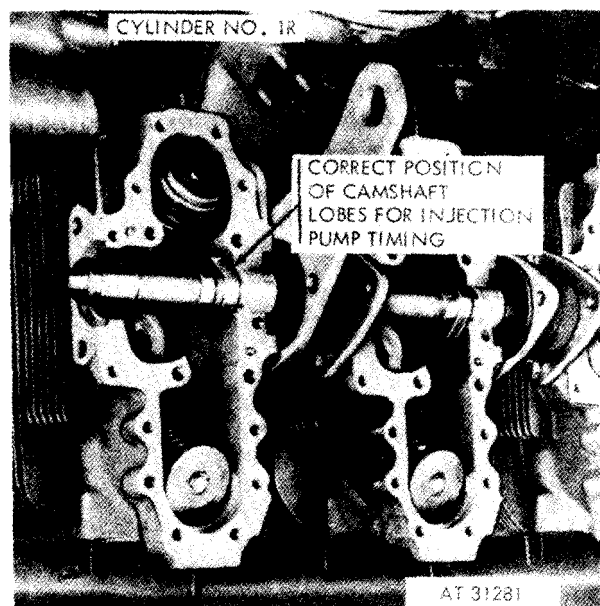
Correct position of cylinder 1R camshaft lobes (cams) for fuel injection pump installation-installed view.
